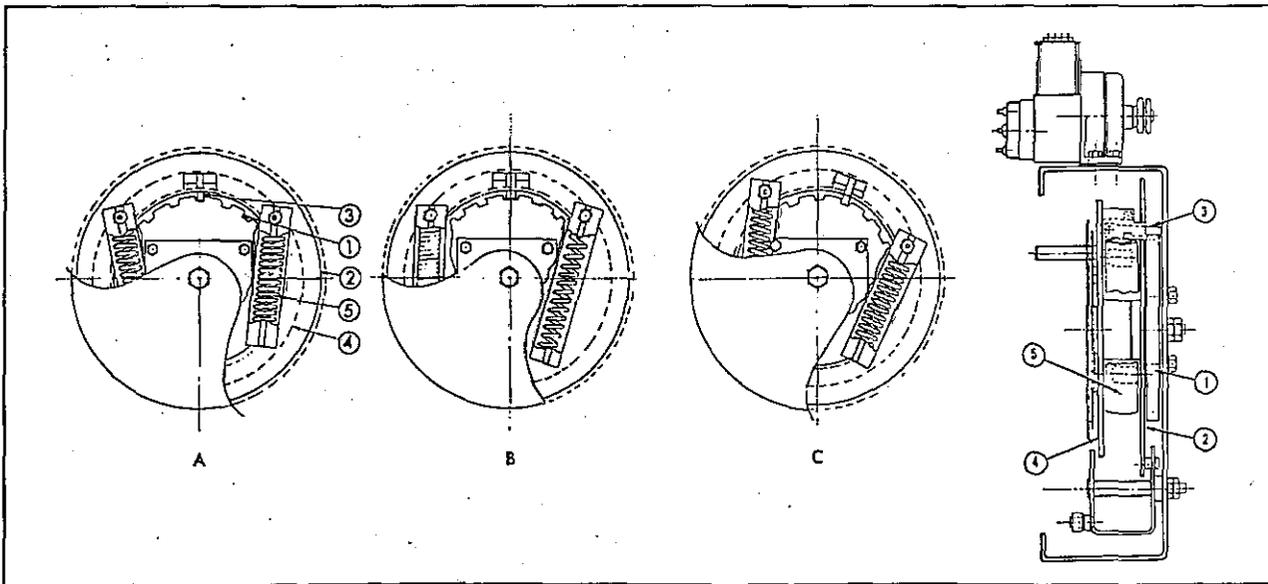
Operating cycle of Type TLS Quick-Break mechanism.
